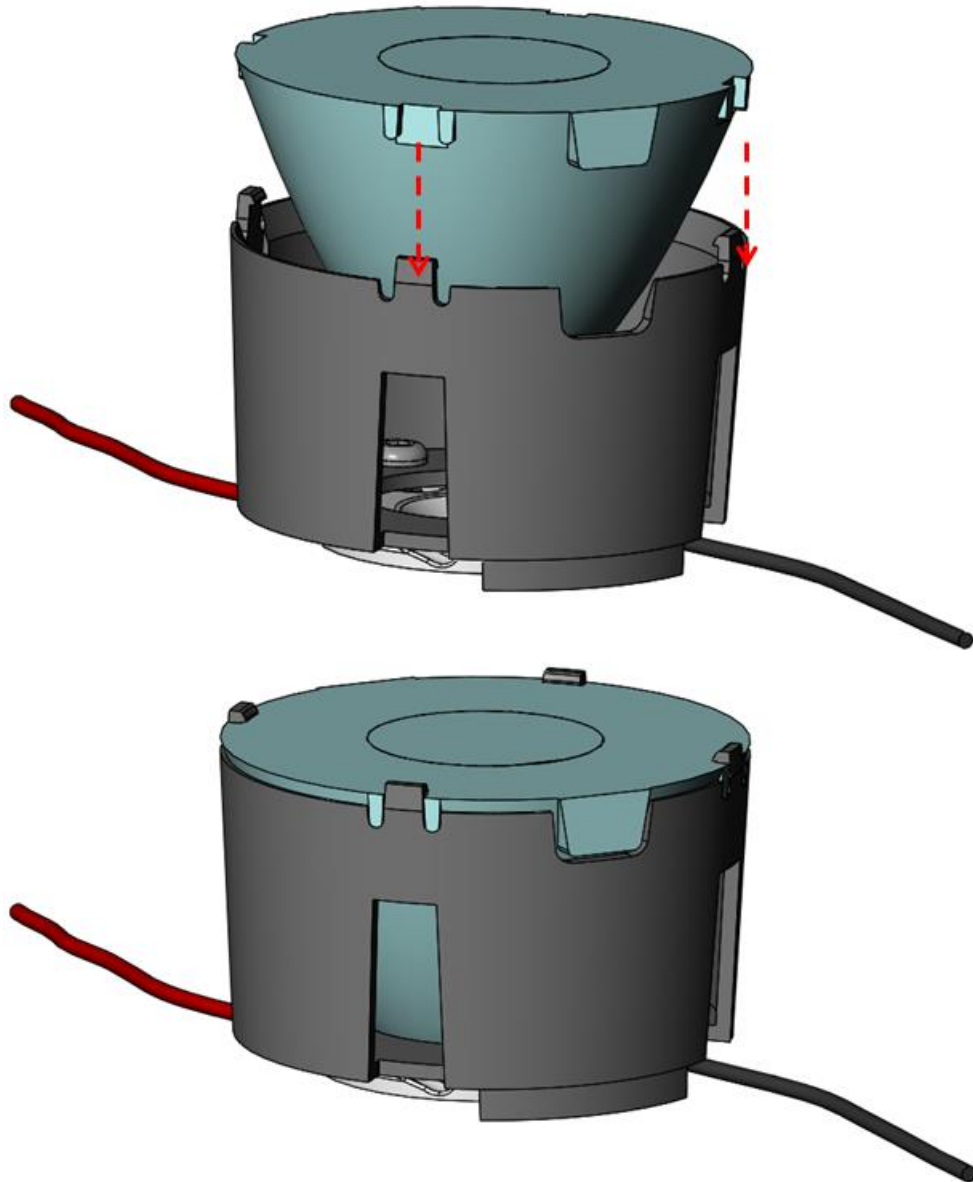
After the Lens Holder is secured to the heatsink with screws, the Nested Lens can be snapped into the Lens Holder.
